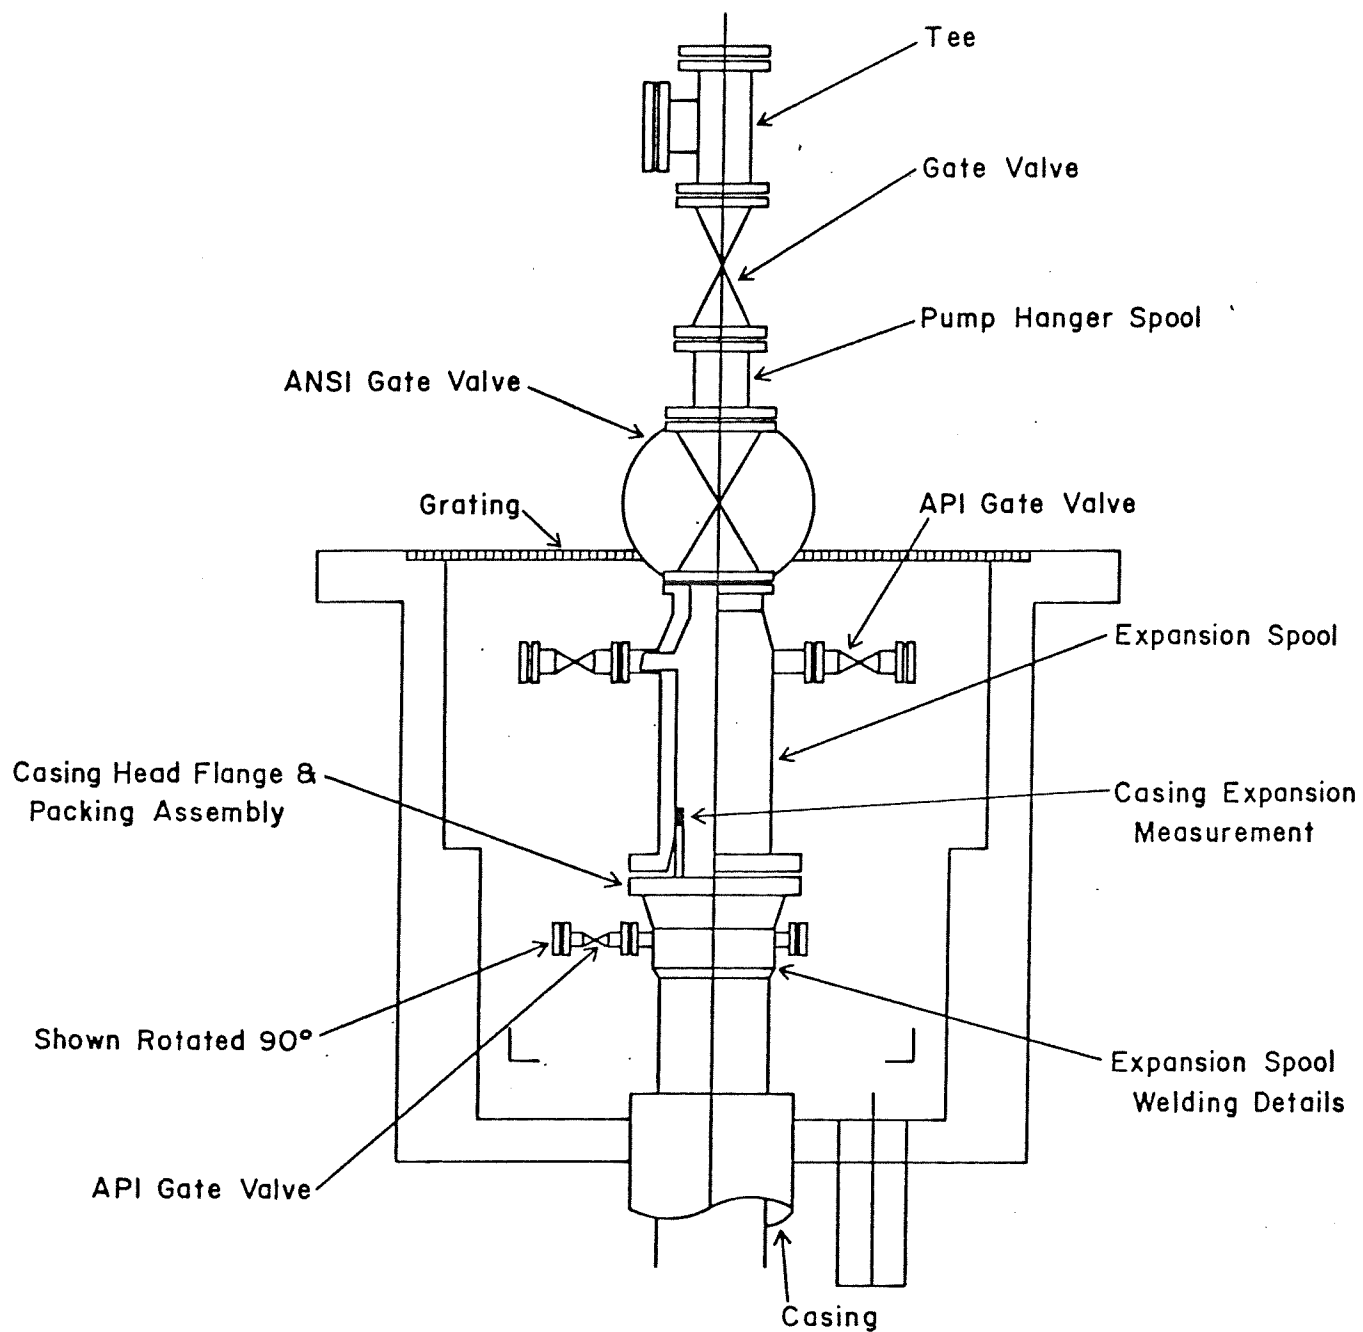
Schematic diagram of wellhead equipment to be installed on completed well
